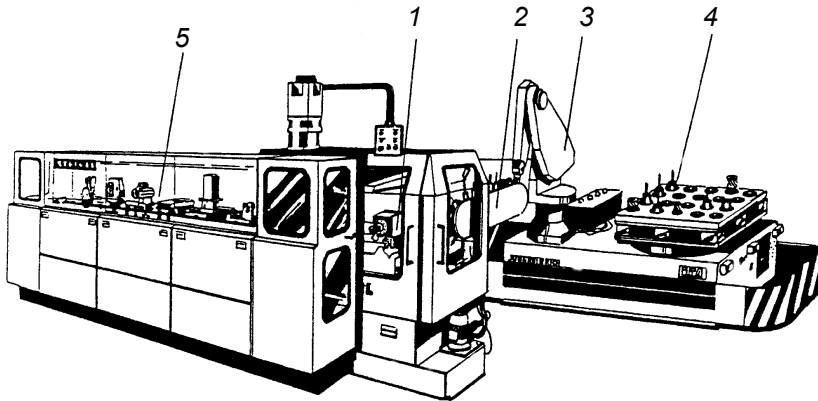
AGV tool transport: 1 – machining centre, 2 – tool-storage matrix, 3 – robotized AGV, 4 – pallet with tools to be exchanged, 5 – work pallet store
